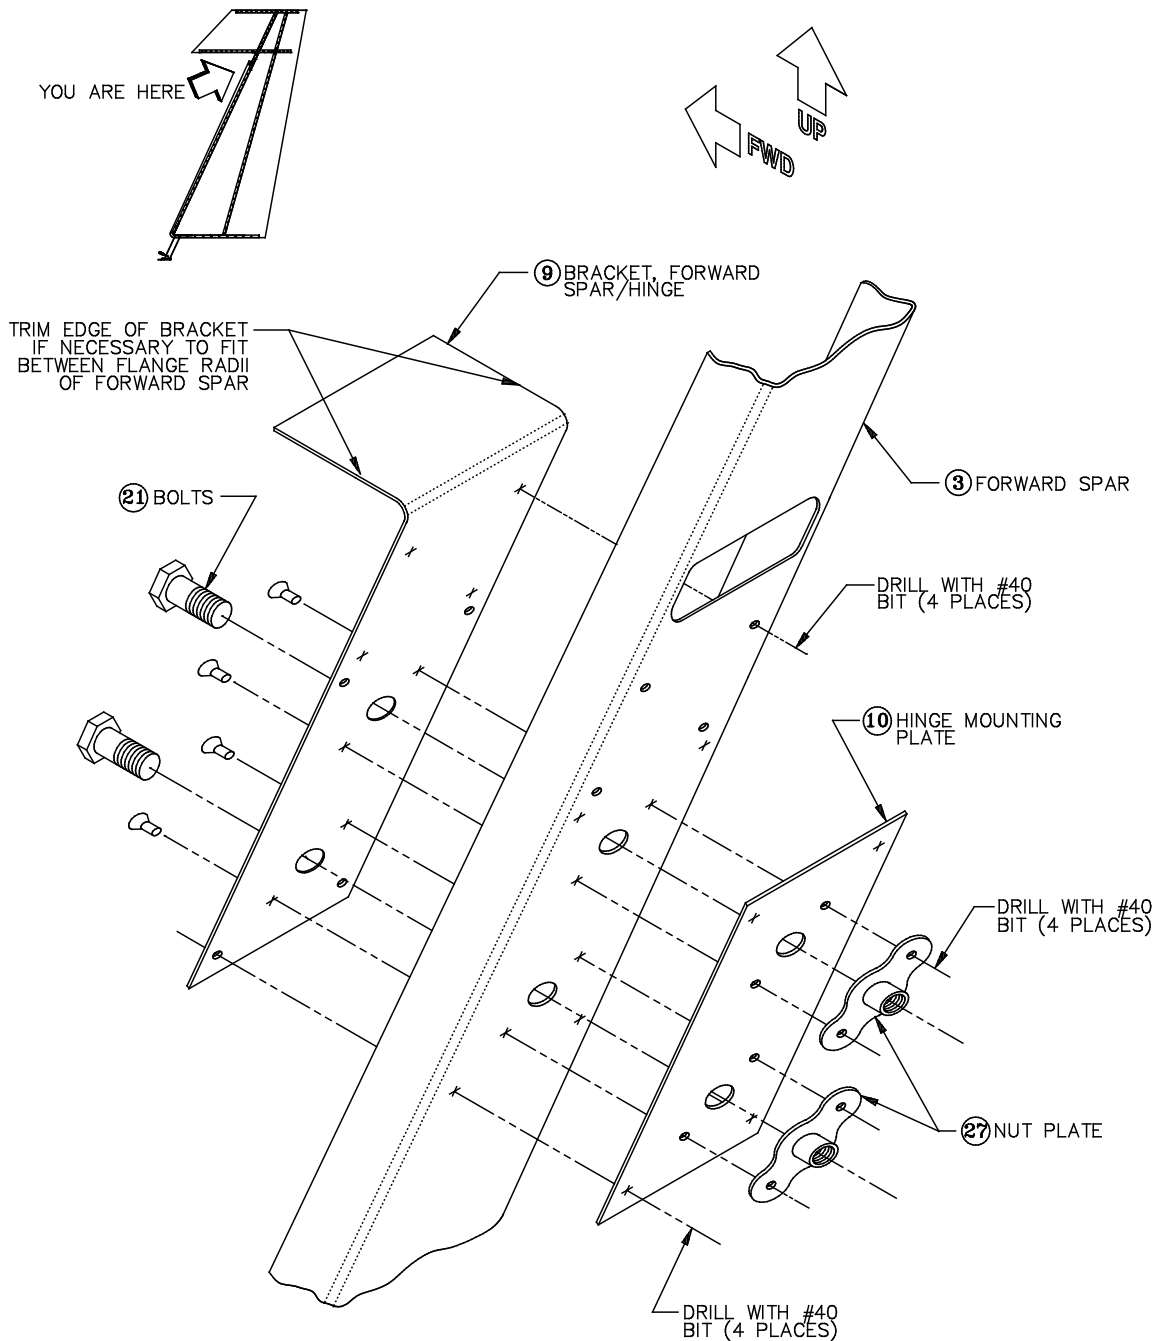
Hinge Mounting Plate and Forward Spar/Hinge Bracket Assembly
